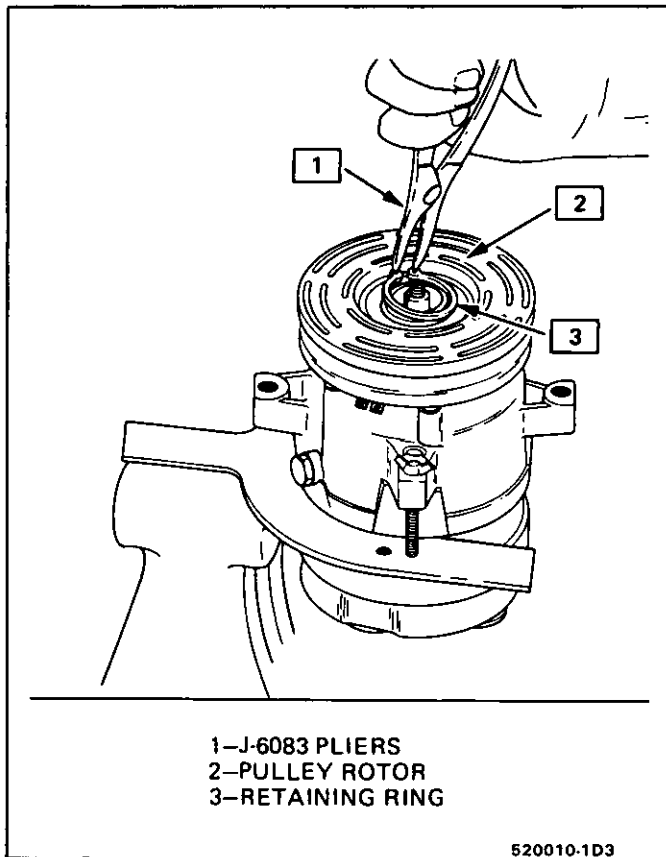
Removing Pulley Rotor & Bearing Assembly Retaining Ring
